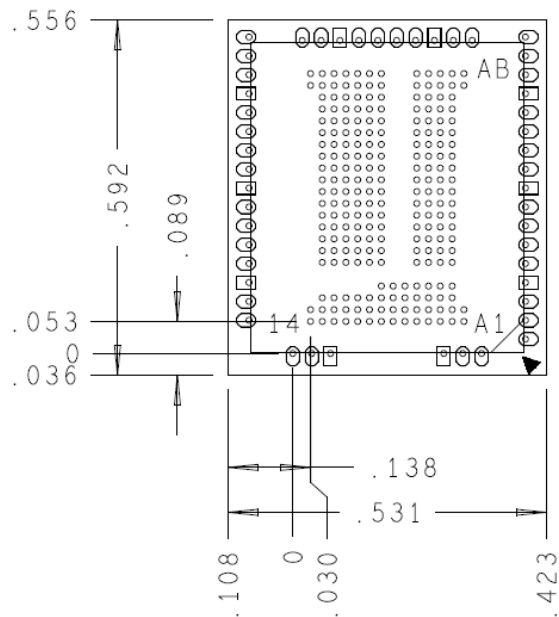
LPDDR3-221 Oscilloscope Component Interposer Dimensions
